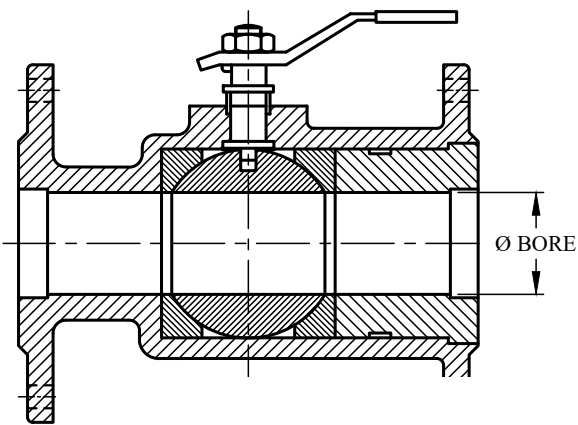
A ONE PIECE FLANGED ENDS CONSTRUCTION
